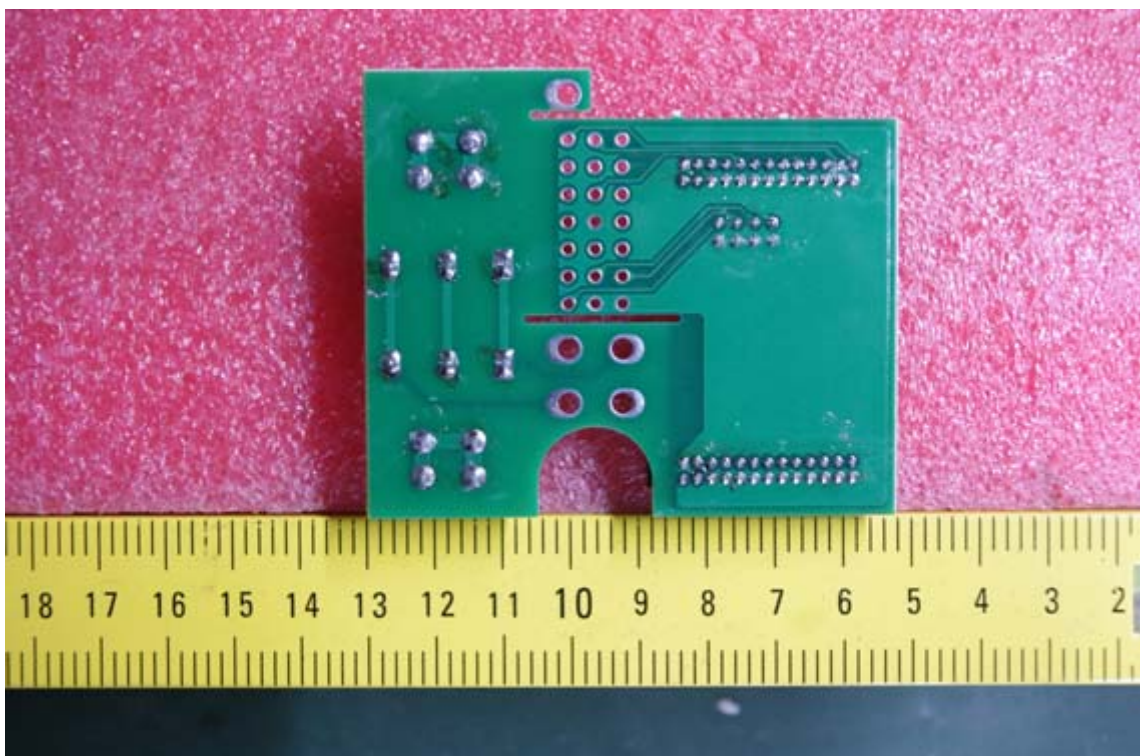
Board SNT\_PCB\_3320\_ZJ, traces side view
